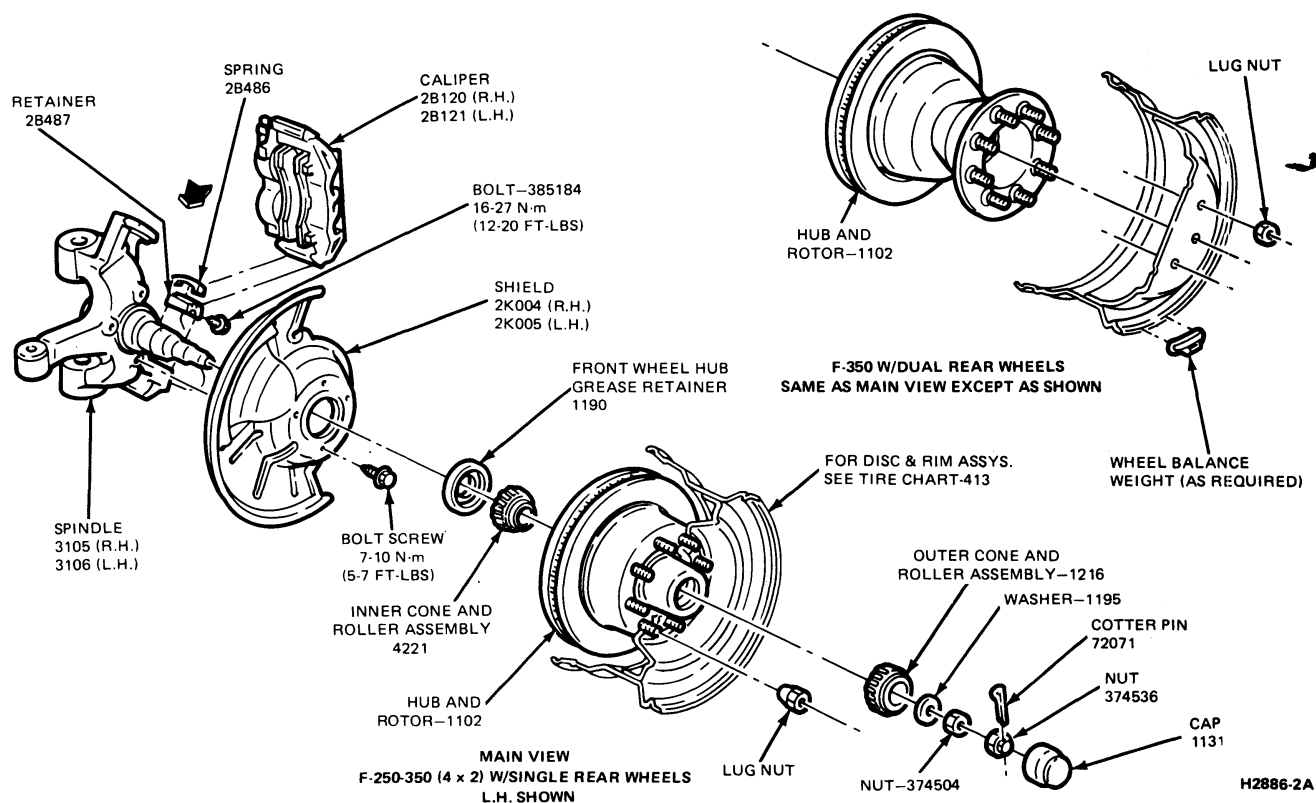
Disc Brake—F-250 (Above 6900 GVW)—F-350, (4x2)
